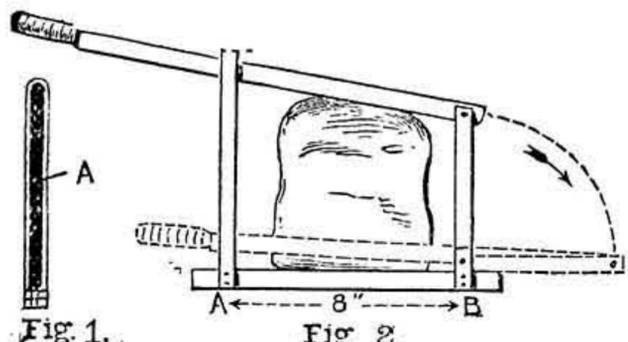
Guide for Knife. Fig. 2.—Machine complete.
